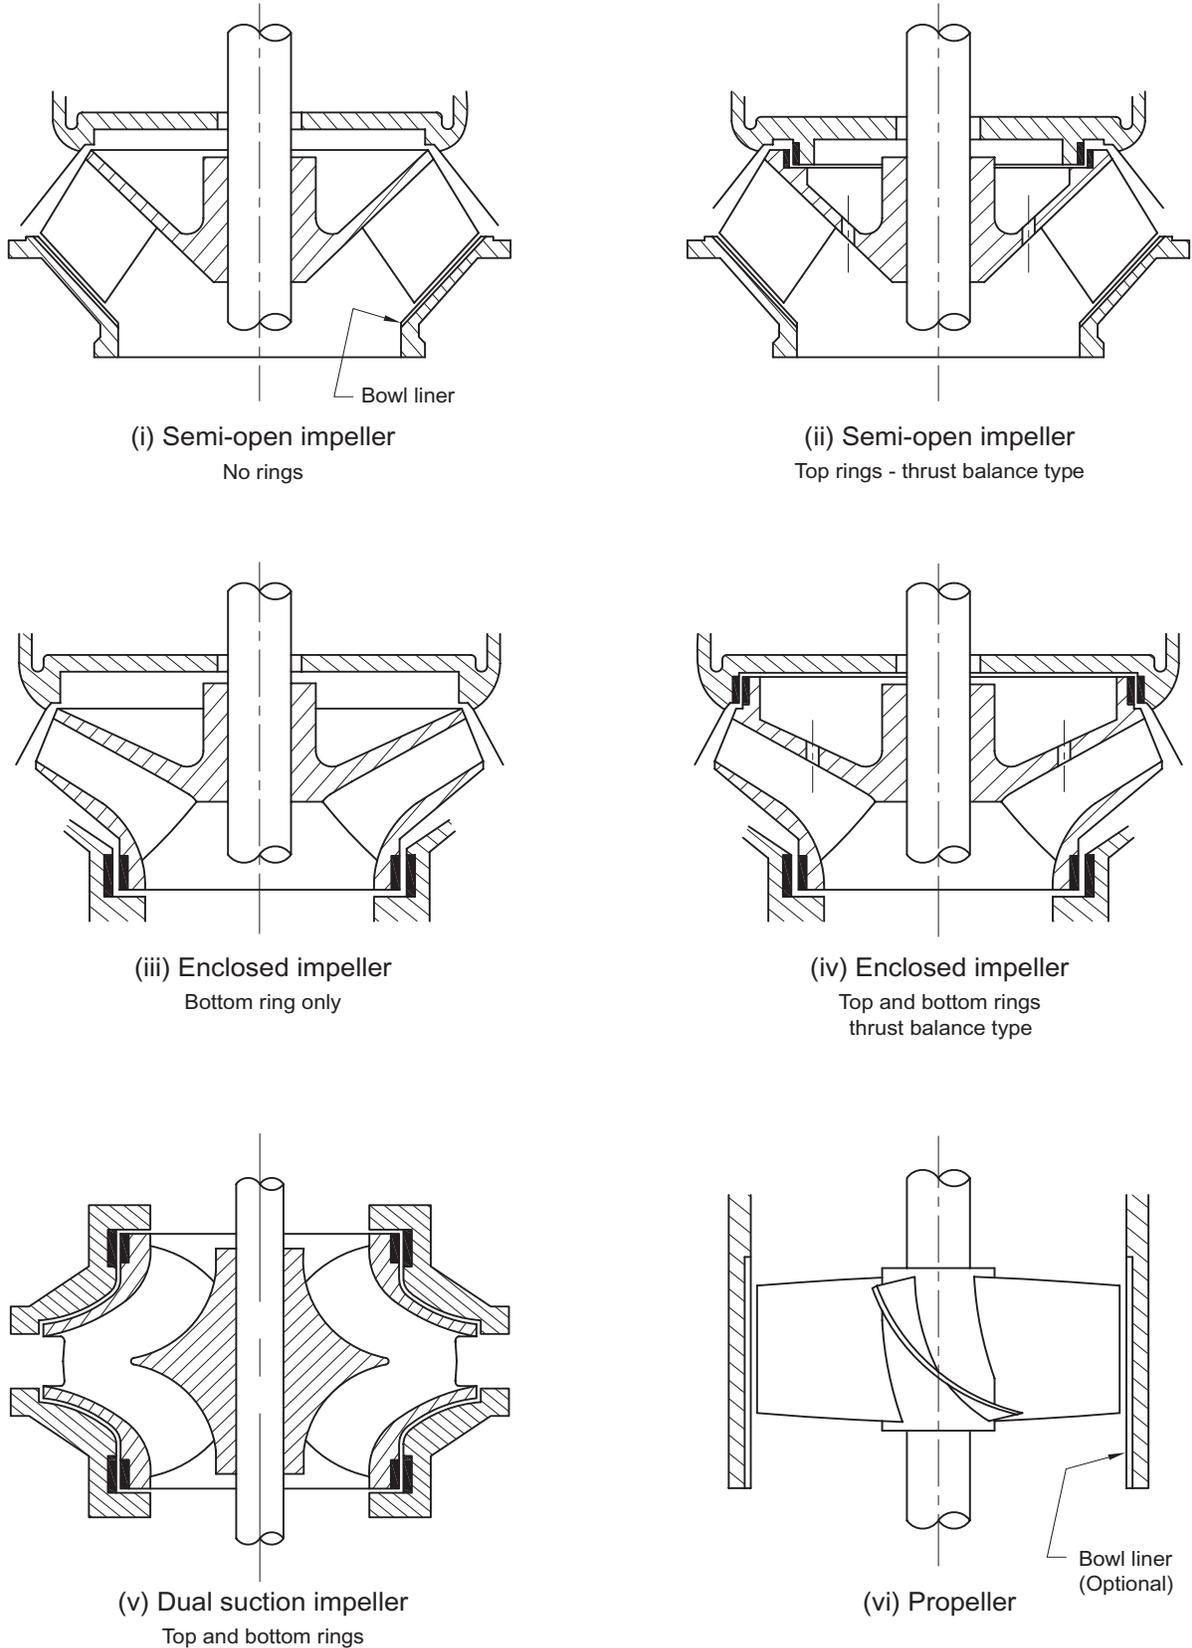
Typical vertical pump impeller types with rings (casing and/or impeller)
